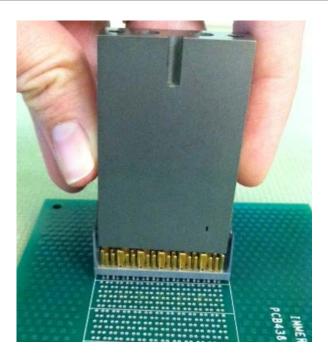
The 6 Pair seating head matches the 6 Pair Backplane module.
